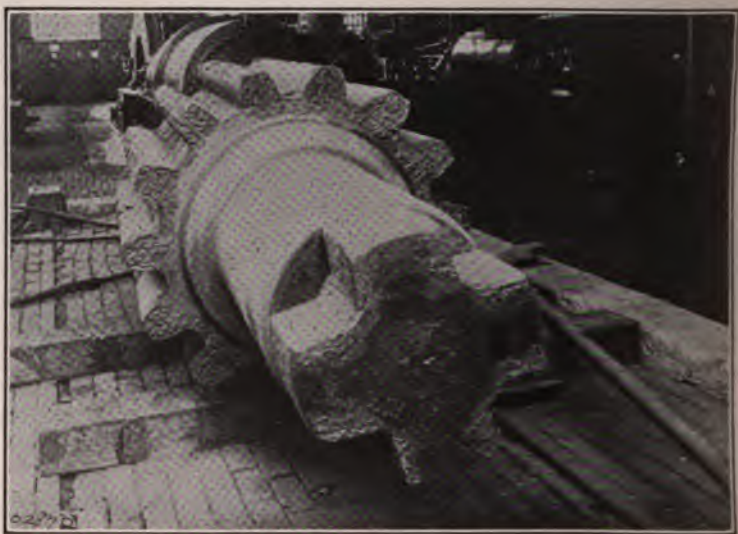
Steel blooming mill pinion with worm coupling end repaired by the electric arc welding. (Courtesy American Rolling Mills.)
